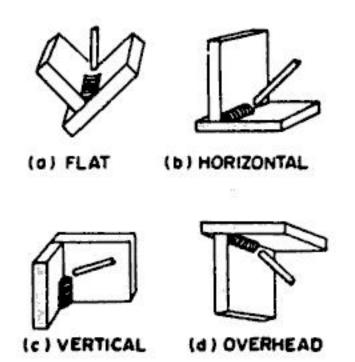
POSITION FOR WELDING : FILLET WELDS.
